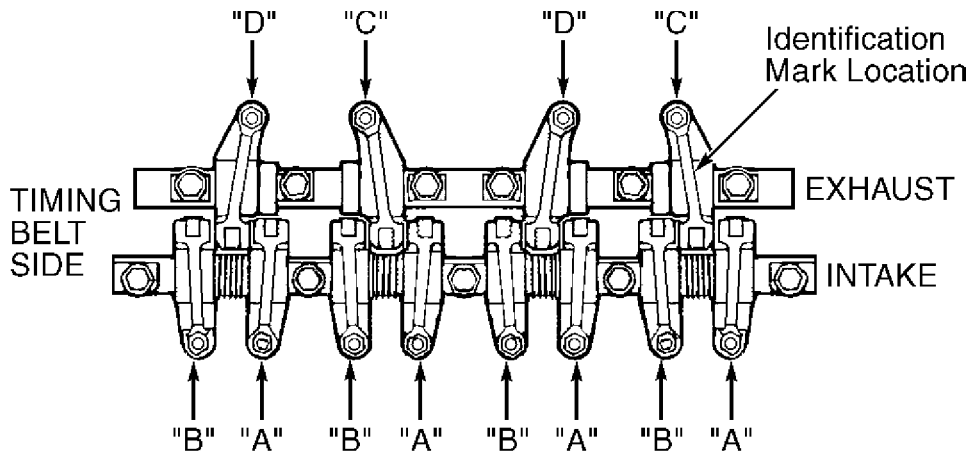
Installing Rocker Arm Shaft Assembly (1.5L Precis)
